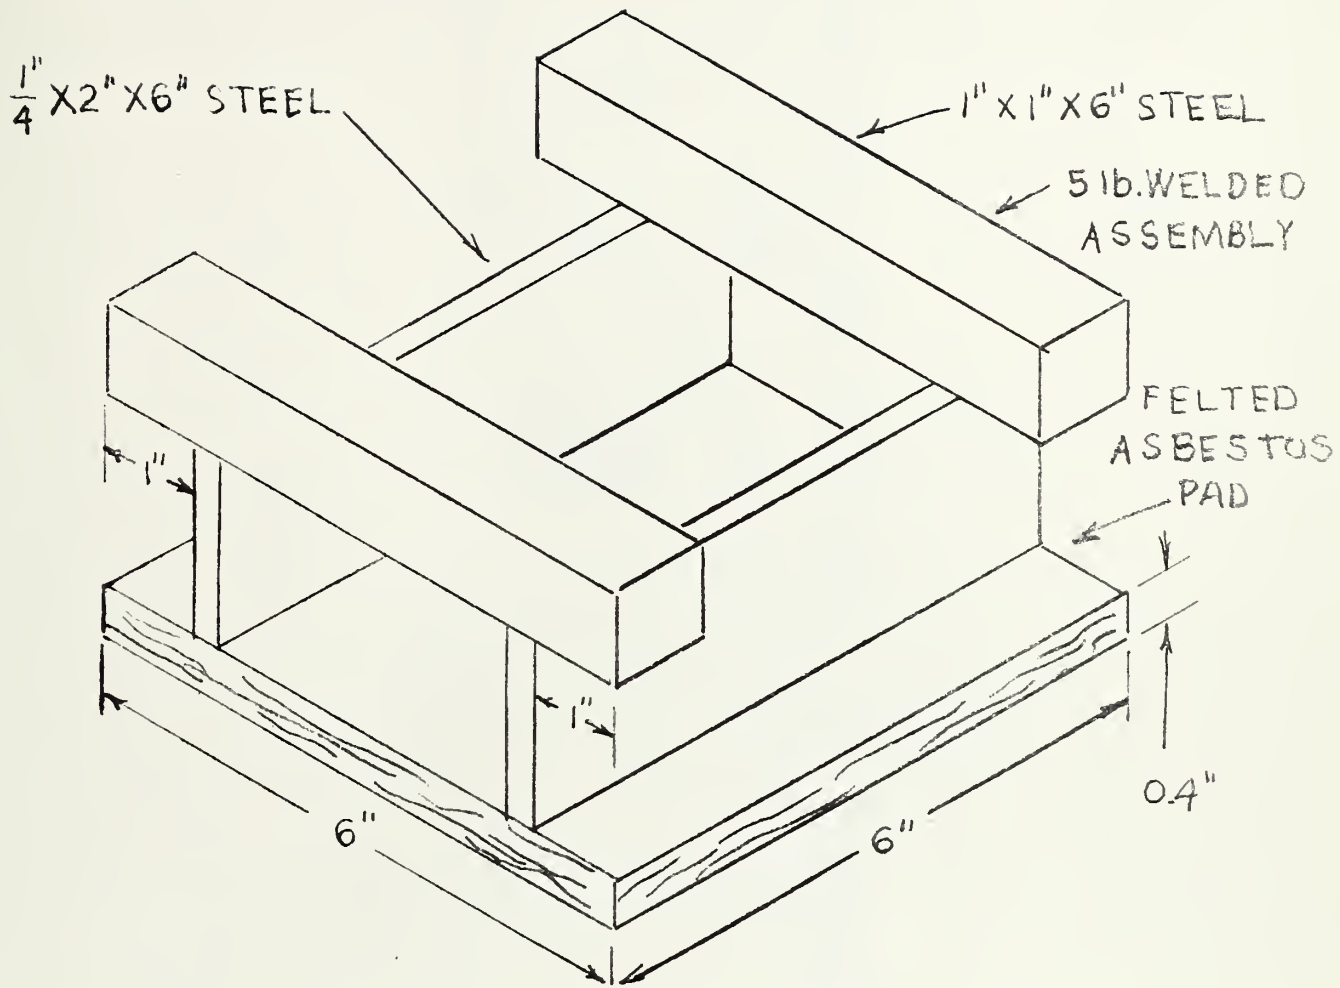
HORIZONTAL MOUNT FOR ASTM THERMOCOUPLE PAD
